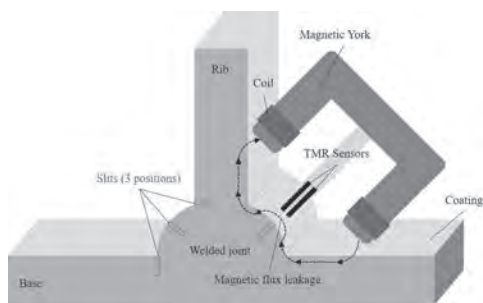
Welded joint sample with surface coating and the sensor probe.
